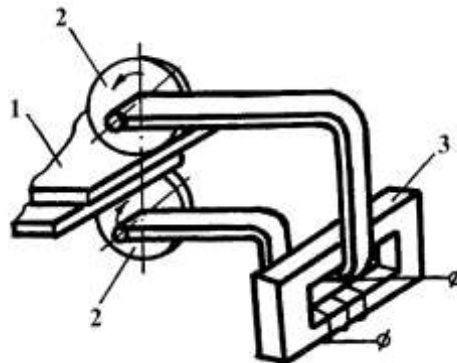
Seam welding process: 1-works; 2-electrodes; 3-transformer
